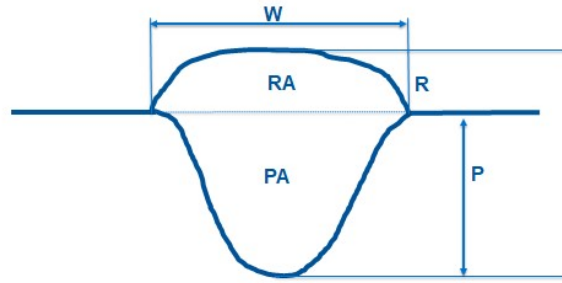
Outline of weld bead geometry denoting key dimensions measured here.
